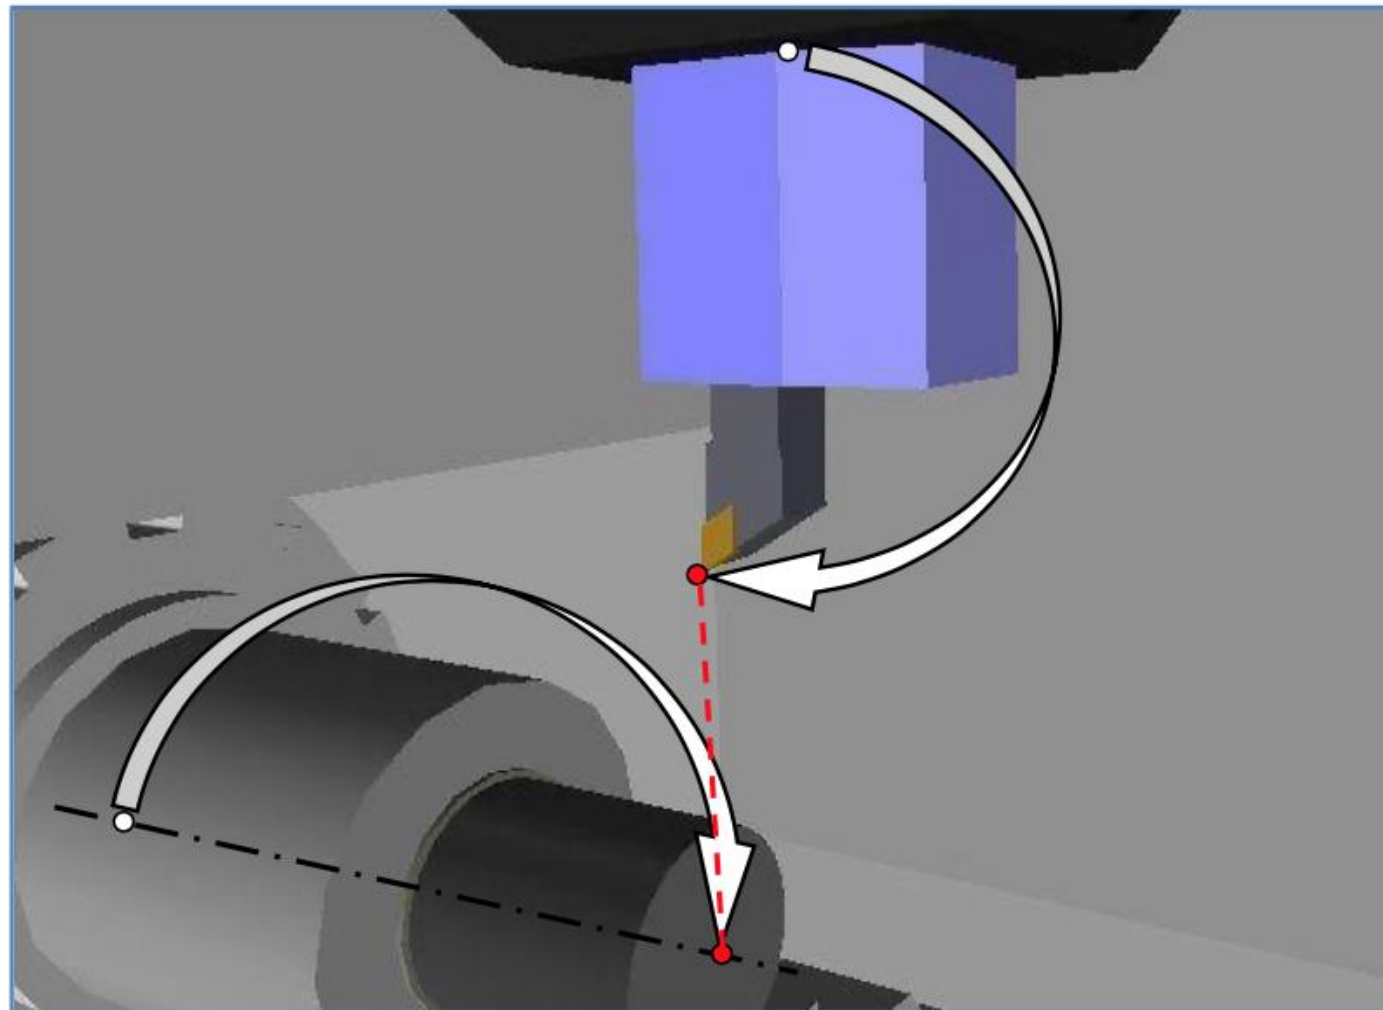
Workpiece coordinate system: tool tip referring to the part zero point
